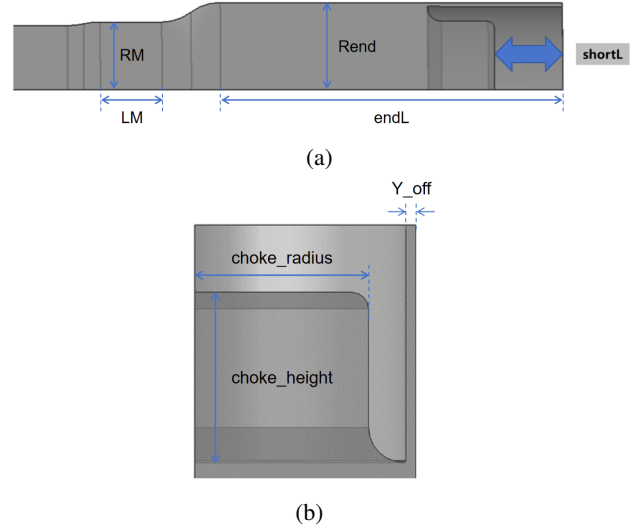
Movable short-circuited piston: (a) geometry (cut view) and (b) choke (cut view).
